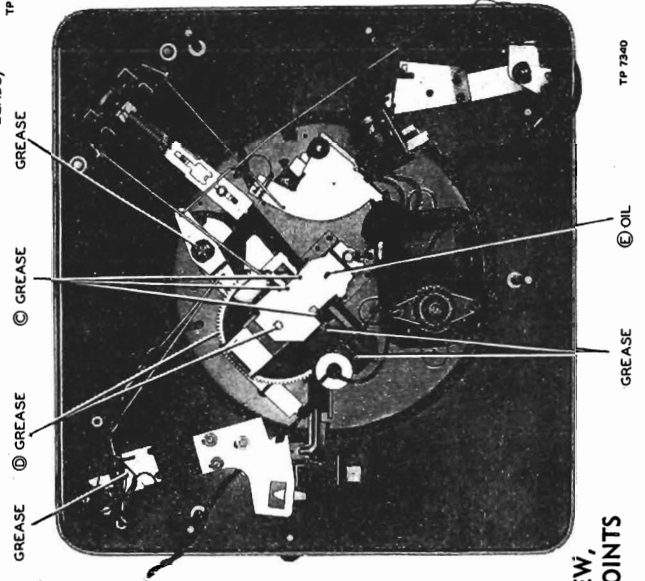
BOTTOM VIEW, SHOWING LUBRICATION POINTS
